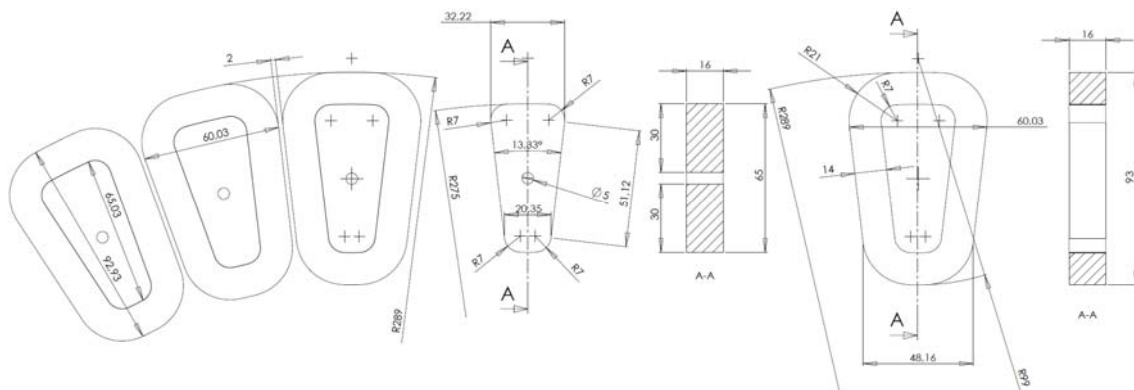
technical drawing of the phase segment, a core segment i.e. tooth and the coil
